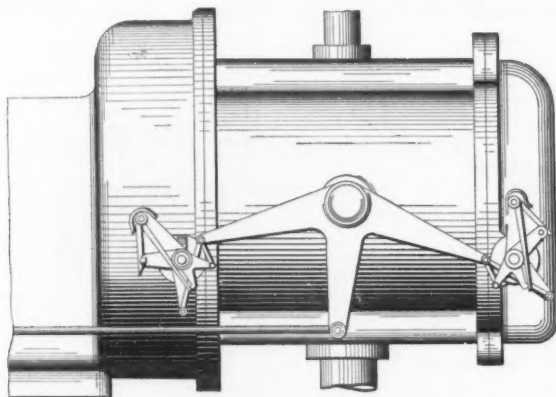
ELEVATION OF AIR CYLINDER AND WRIST-PLATE MECHANISM.
